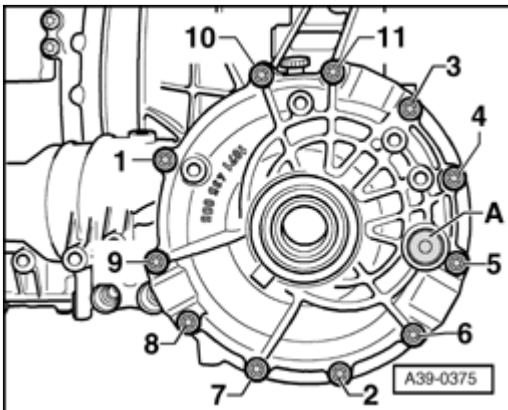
Removing/Installing Bolts On Final Drive Cover In Sequence
